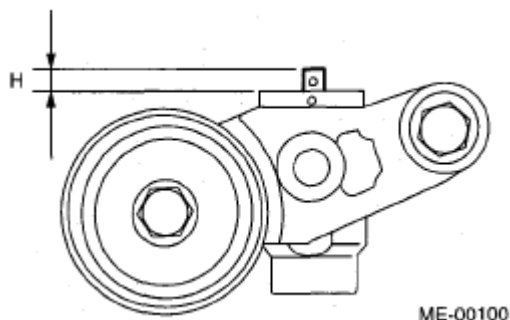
Measuring Rod Protrusion Amount H From Body Edge
